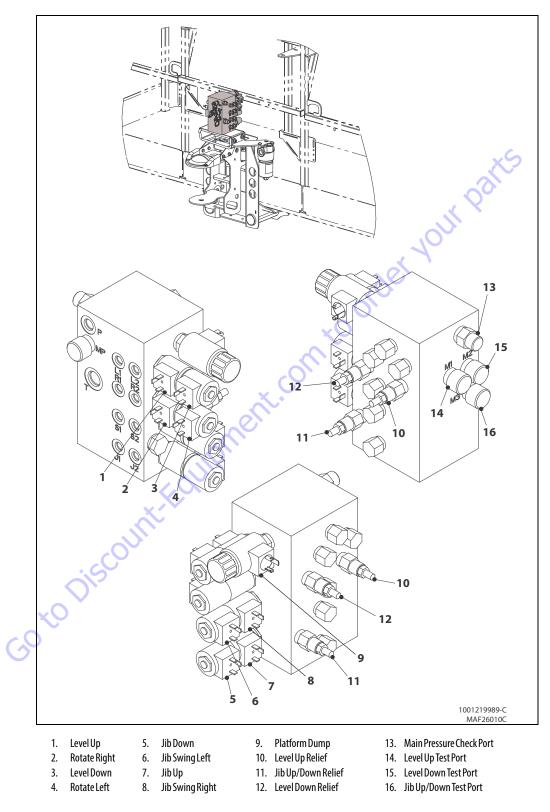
Platform Valve Identification - JLG PN 4641266
